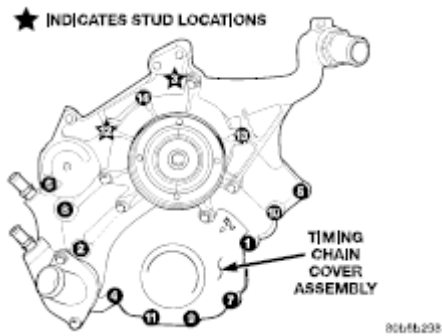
Identifying Removal & Installation Sequence Of Timing Cover Bolts
